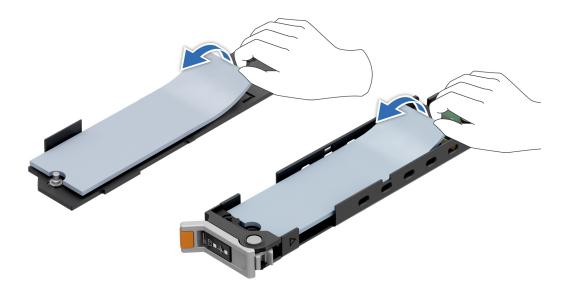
Removing the old thermal pads on the top and bottom of the BOSS-N1 DC-MHS card carriers
